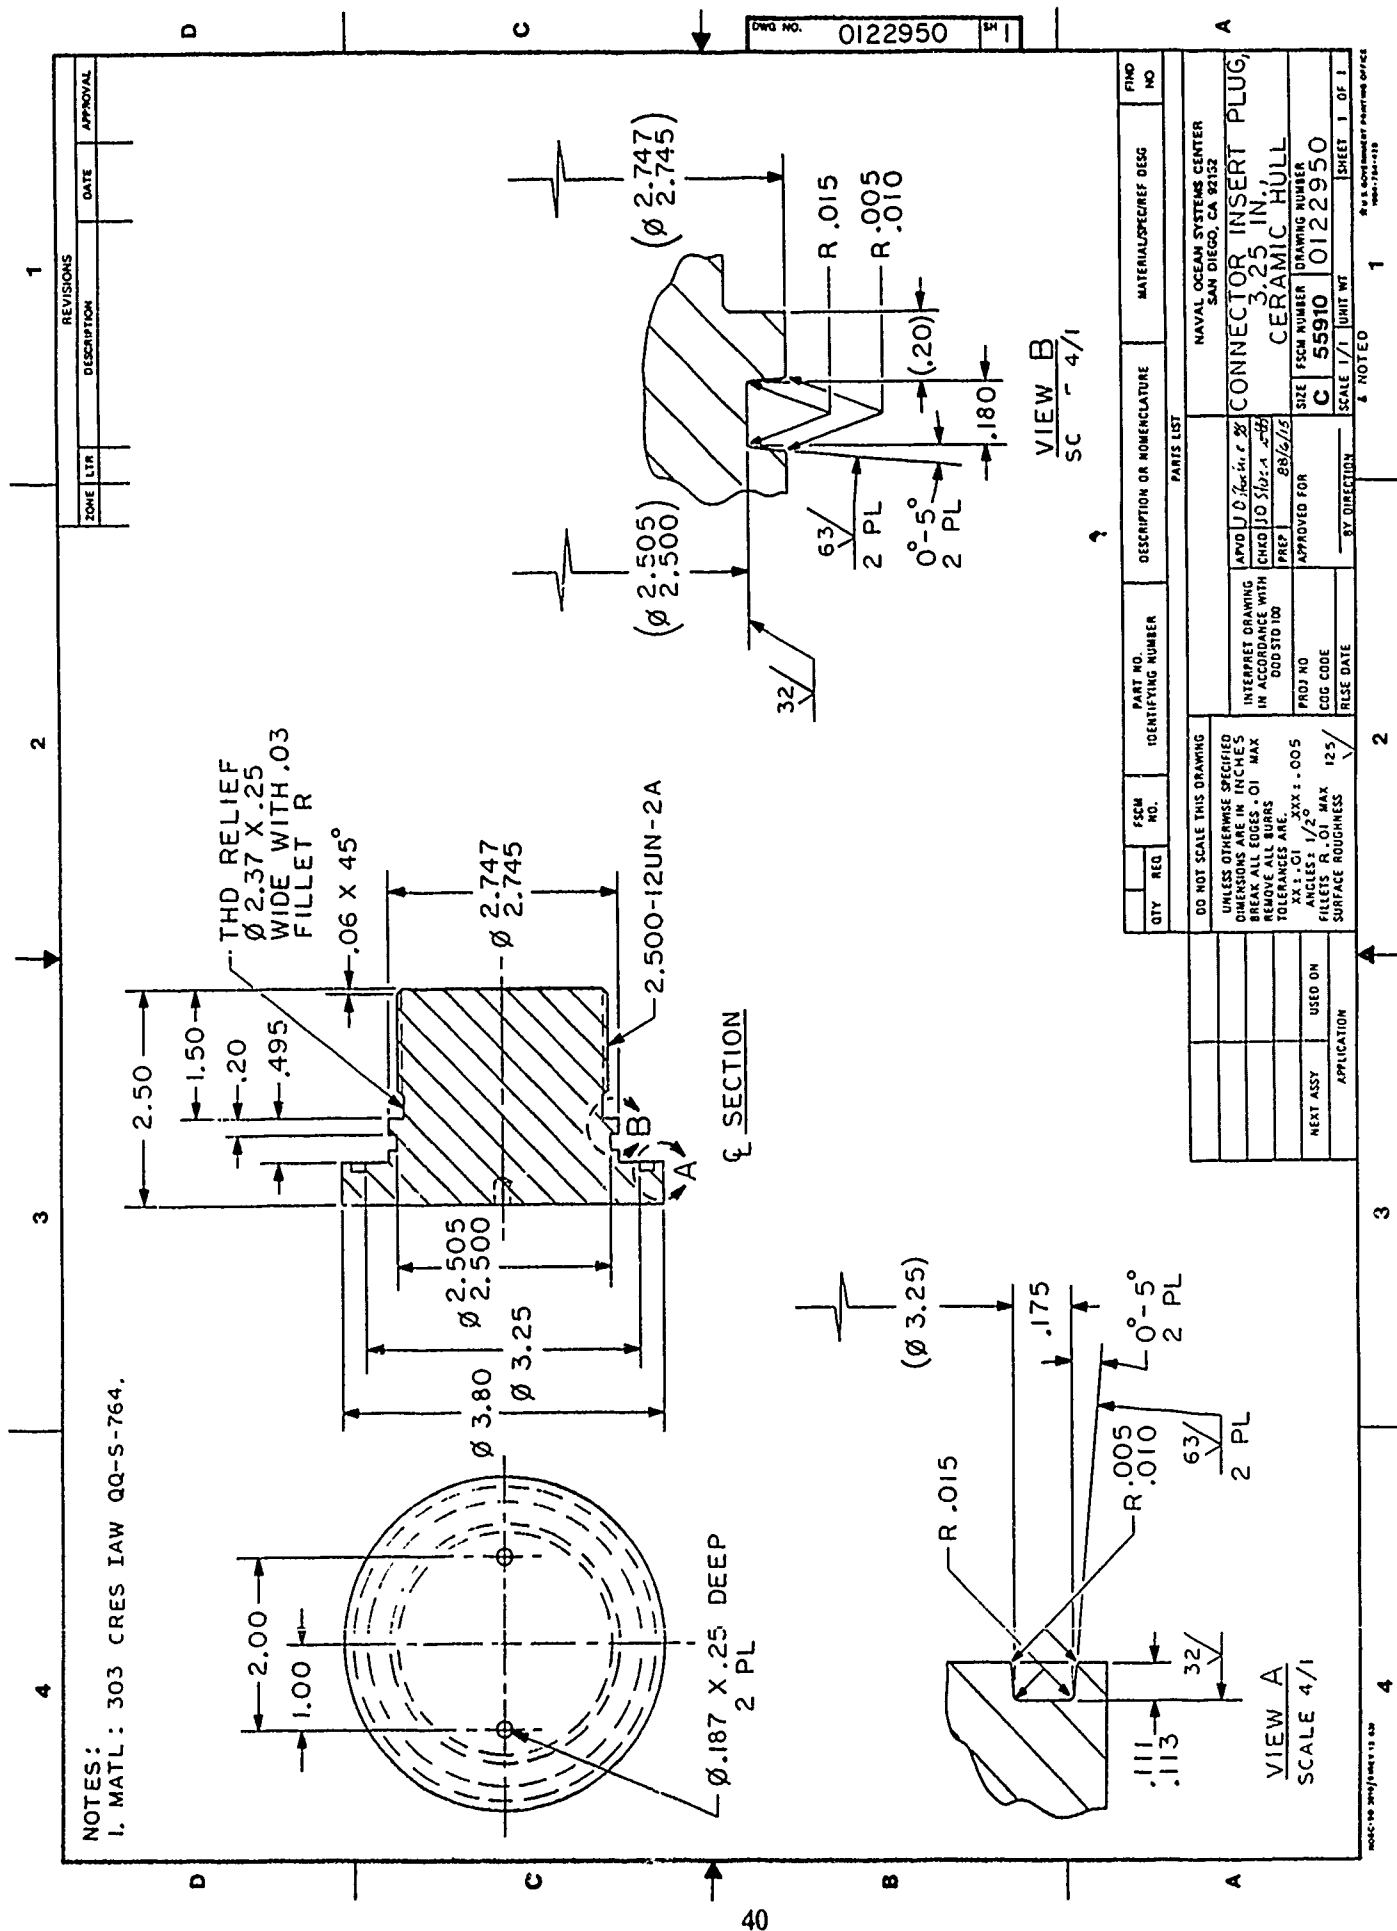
Fabrication drawing for dummy plug used to close off 3.25-inch-diameter connector inserts.
